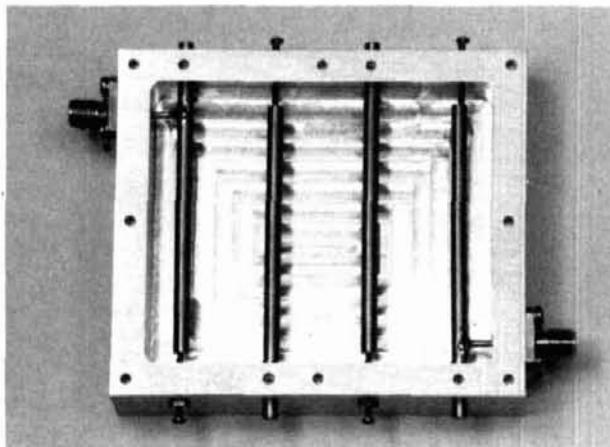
An overall view of the machined 1296-MHz filter. The sheet metal cover has been removed to show the internal cavity and the 4 resonator rods.
